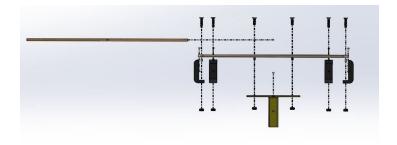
Exploded view of the MDF Laptop Platform & Connection Piece Assembly
